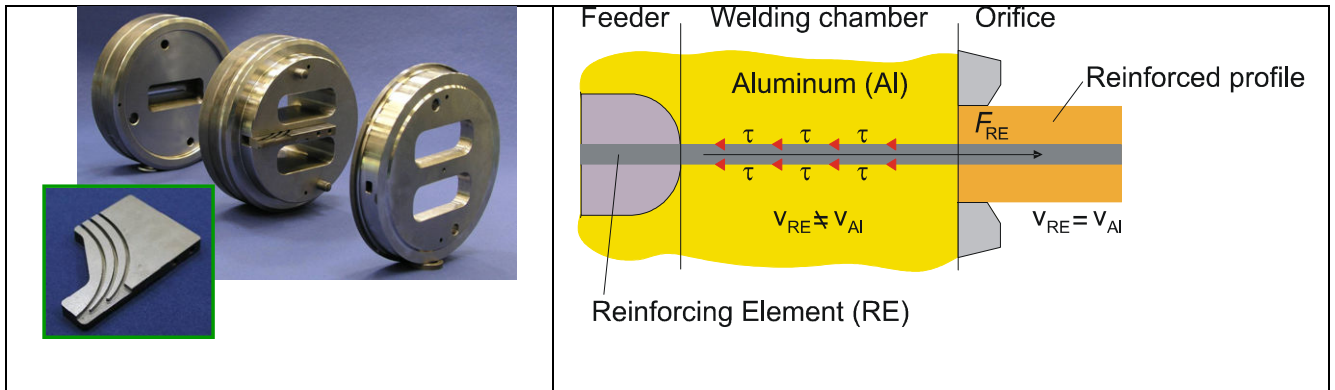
Tool design and conditions in the welding chamber [5]
